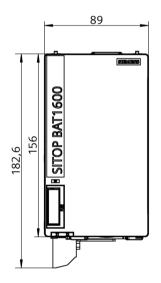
Dimension drawing 6EP4137-3AB00-2AY0
